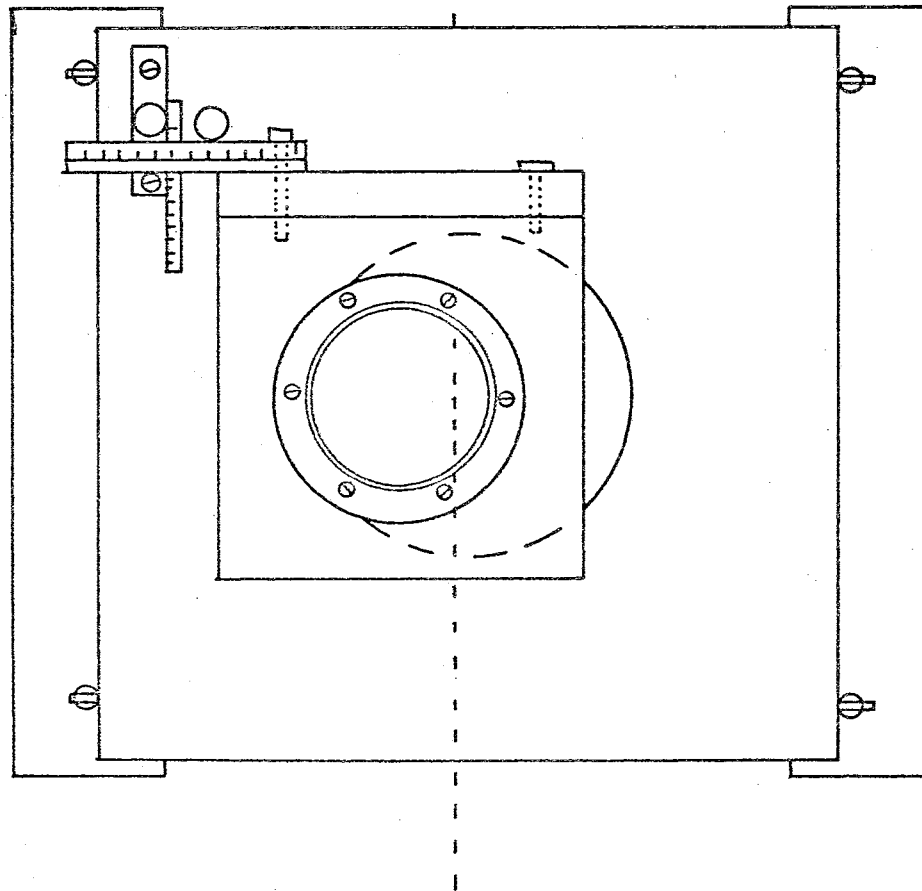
Top View of Adjustable Platform for Holding Moving (Rotated) Medium
